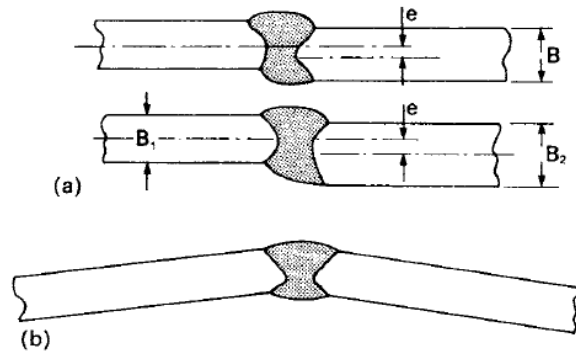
Weld axial and angular misalignment [11].
